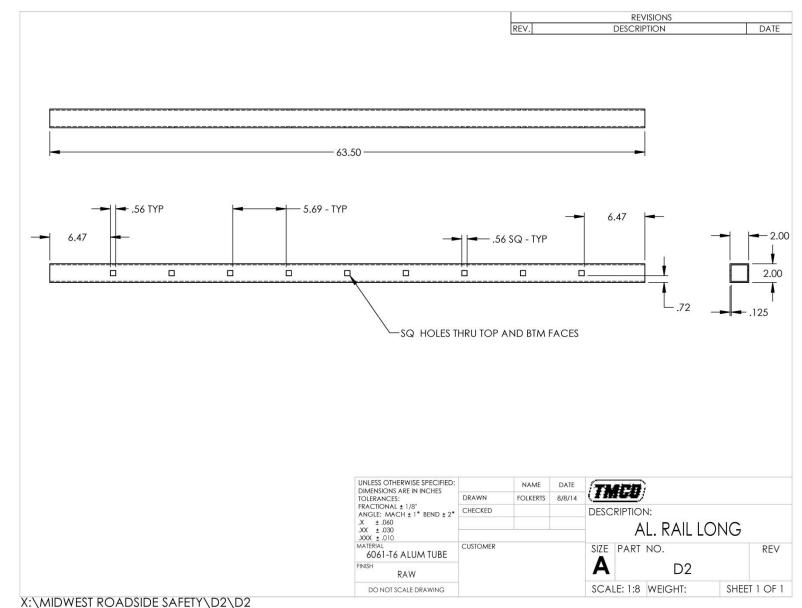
Fabrication Drawings, Test Nos. APR-1 and APR-2
